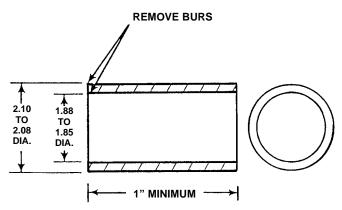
SHAFT SEAL ASSEMBLY (30 HP)
